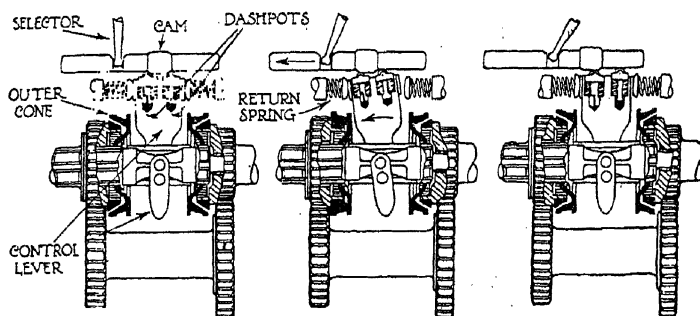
Three Stages in the Changing of a Gear, with Synchromesh Cones. (*The Autocar*).
